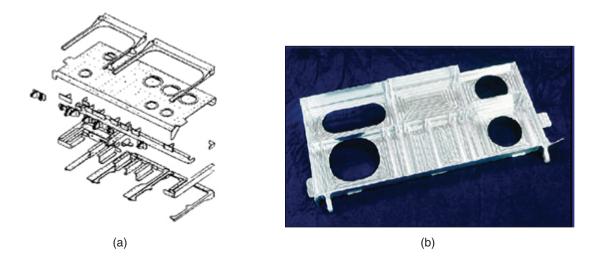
Production of avionics tray by (a) riveting of multiple stamped parts, and (b) machining from a monolithic block of aluminum.
